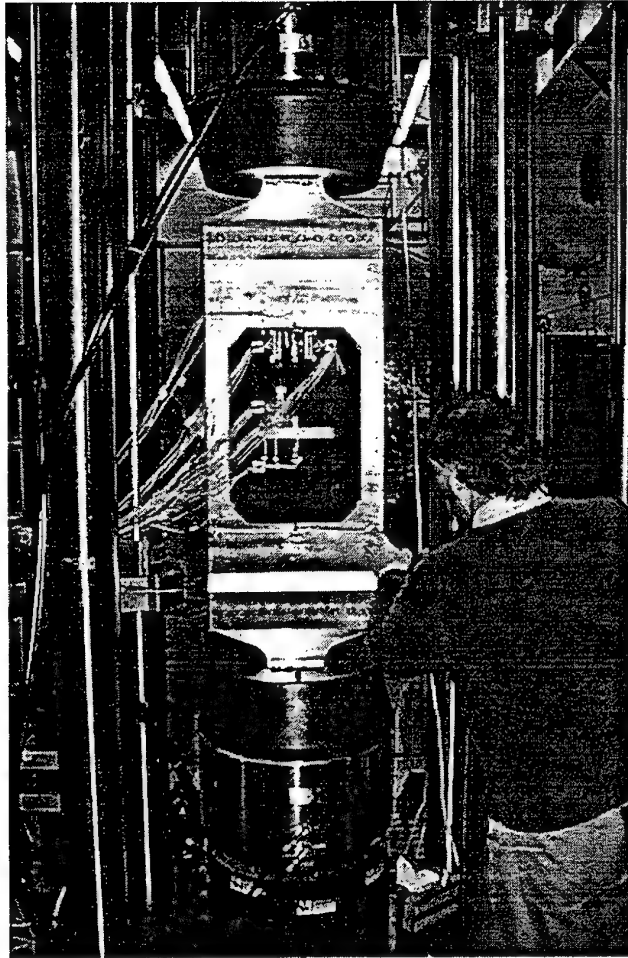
View onto side 1 of second box specimen in 2 MN testing machine showing strain gauge array and fracture line below end of patch.
